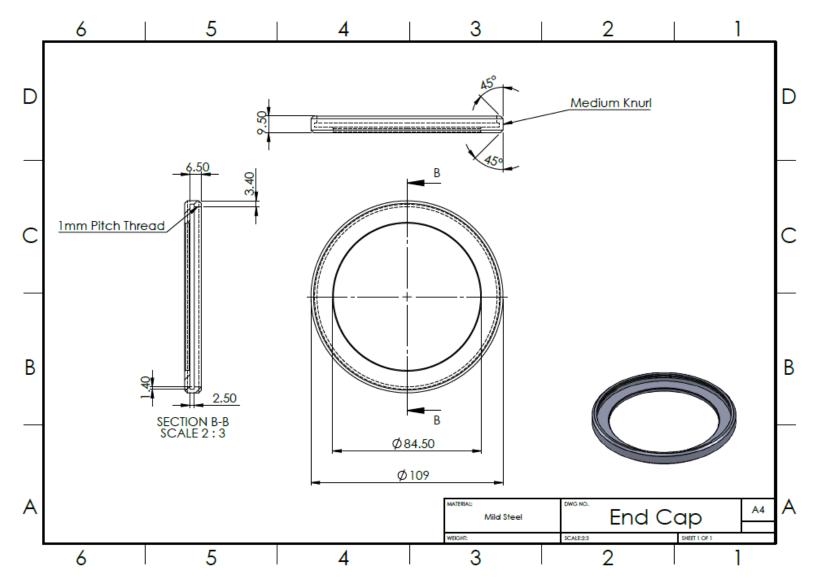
Mechanical drawing of the end cap component with dimensions (mm)
